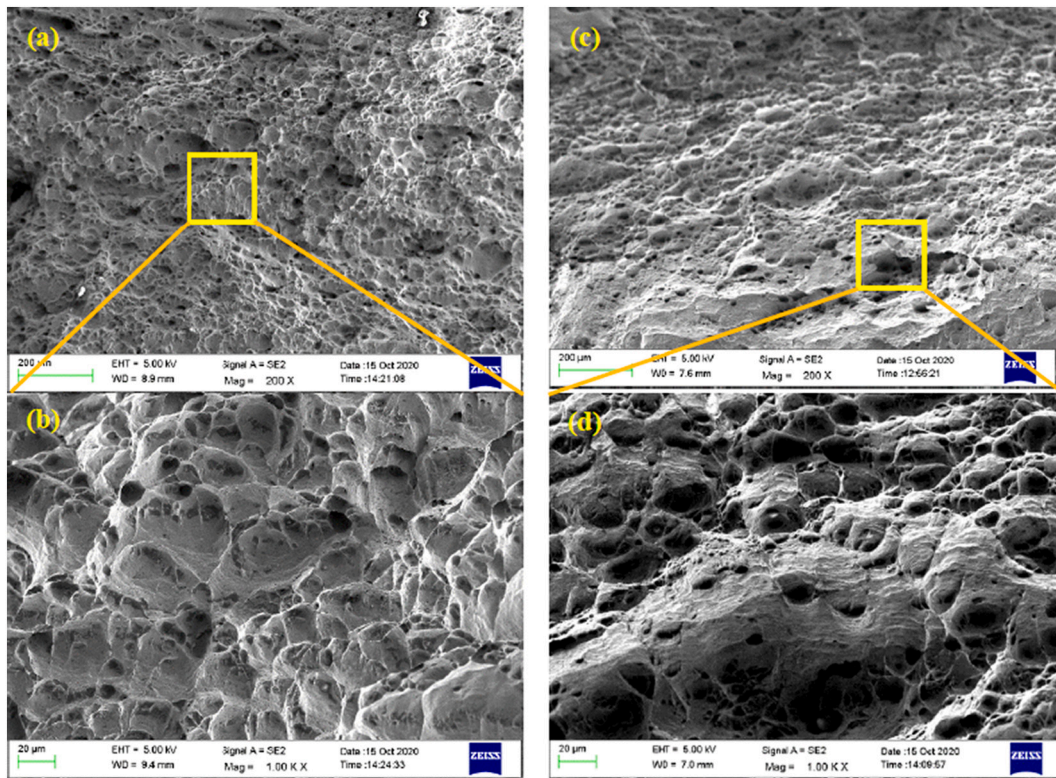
SEM images of the fractured surfaces in case of sample D, (a) and (b) fractured surface images at Cu side, and (c) and (d) fractured surface images at SS side.
